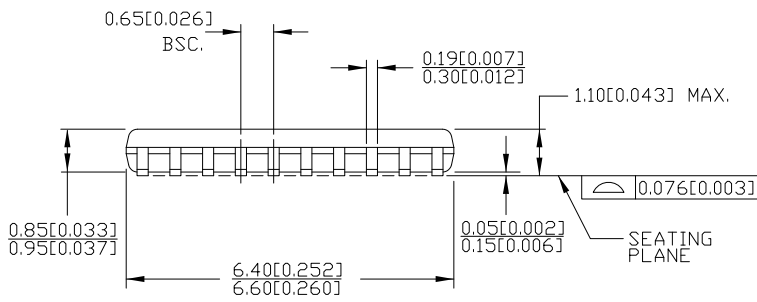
20-Pin Thin Shrunk Small Outline Package (4.40-mm Body) ZZ20
